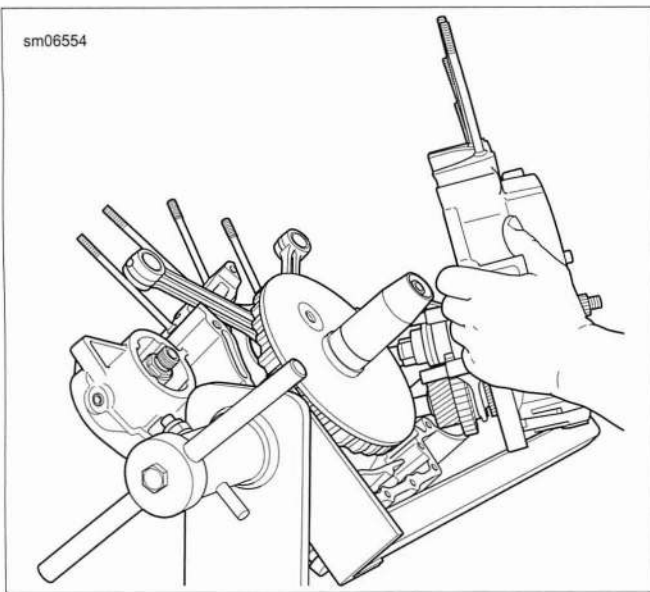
Assembling Crankcases with Crankshaft Guide Tool (Part No. HD-42326-B)
